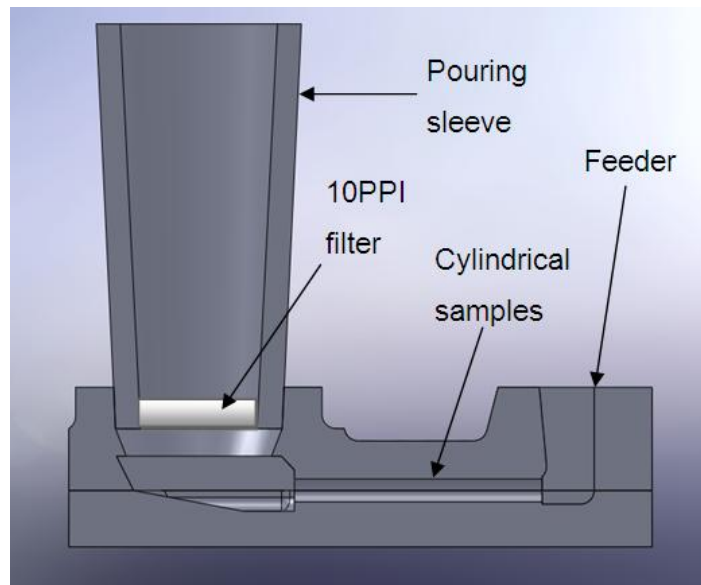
Sectional CAD drawing initial mould design, showing pouring entrance cup, cylindrical cavity and riser
